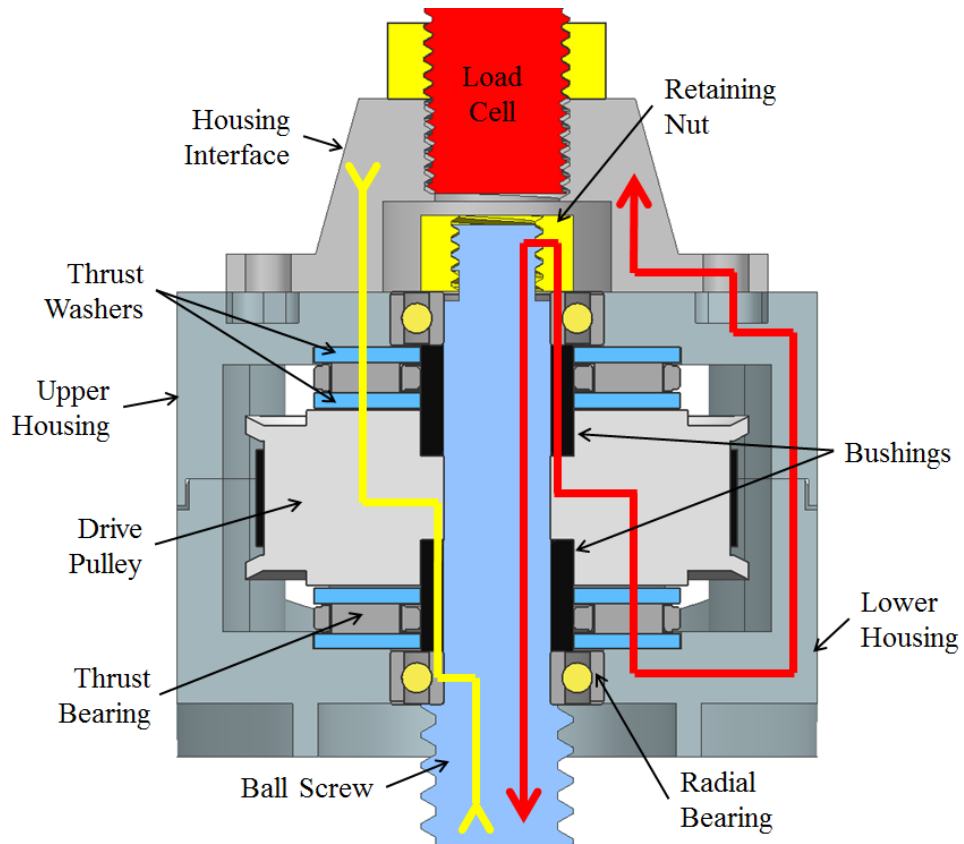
Cutaway view of bearing housing, showing the compression and tension load paths. Each load path is symmetrical.
